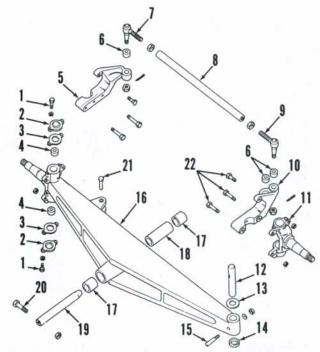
Exploded view of heavy duty (cast) nonadjustable front axle used on some tractors.
